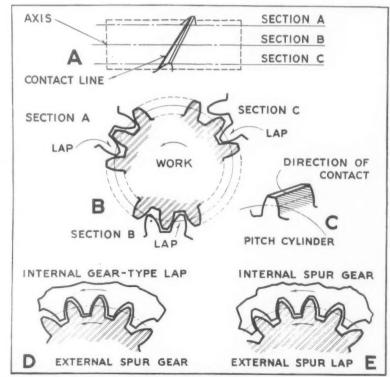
Diagram illustrating principle of Lapping External Helical Gears with Three Helical Gear Type Laps, also Internal Type Lap for Spur Gears.
